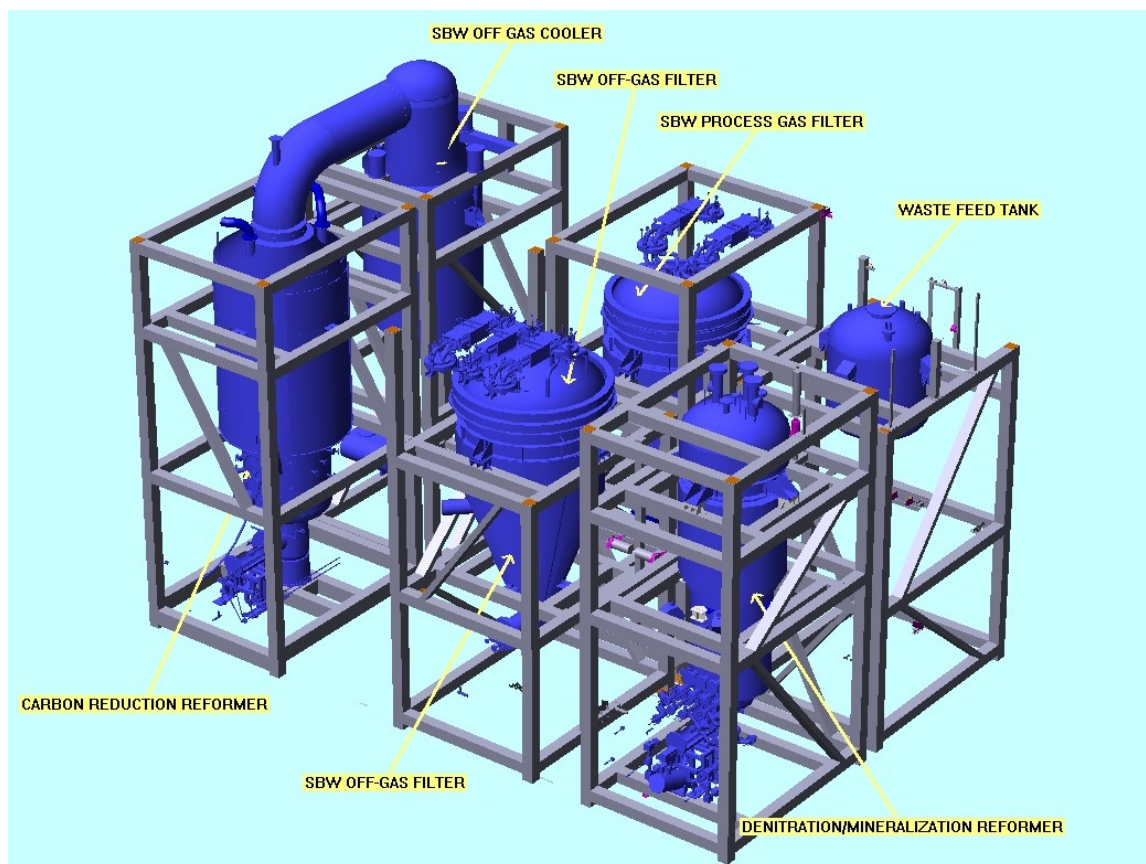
Steam reforming process equipment module arrangement – shielding removed for clarity.
